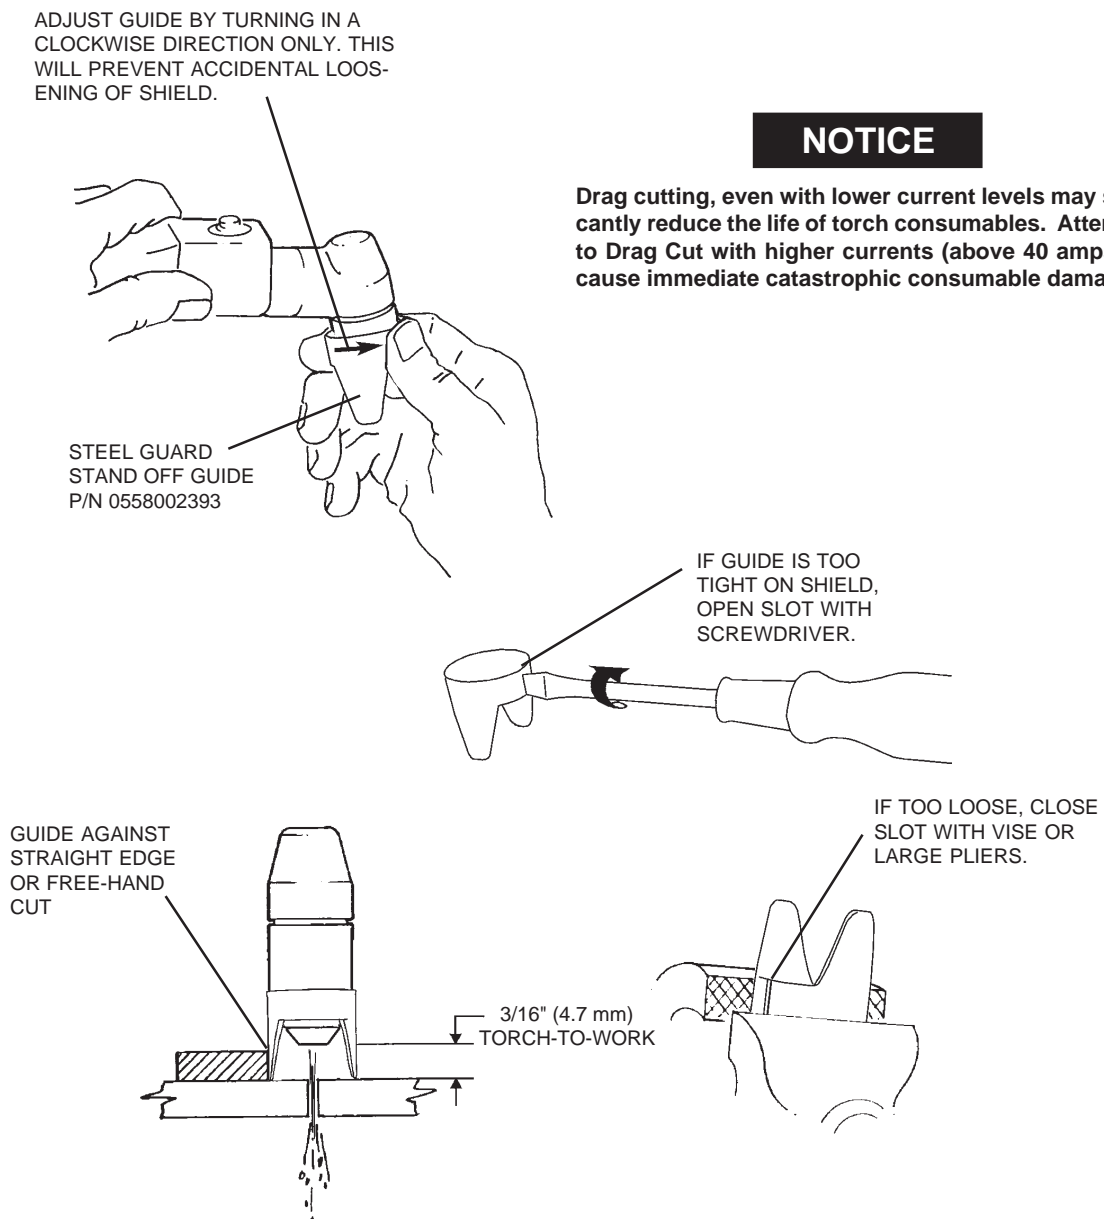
Installation and Operation of Steel Heat Shield Guards
